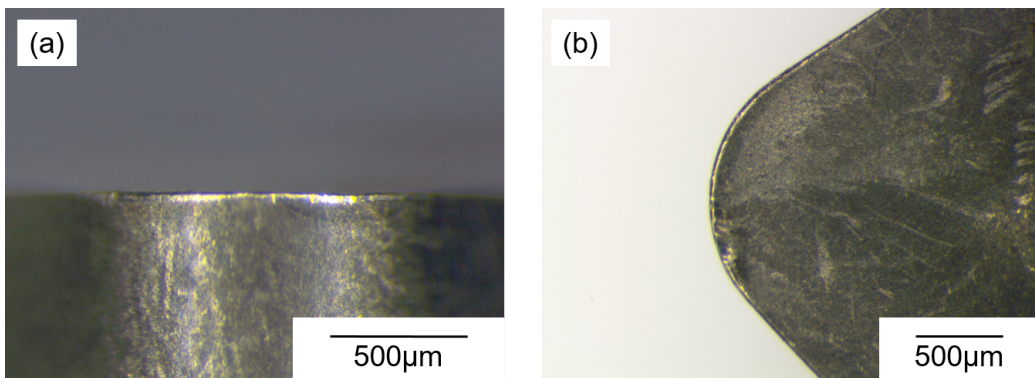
Microscope images showing the degree of tool wear after trial 1.2.5 on billet 4.1. Showing (a) the flank face and (b) the rake face.
